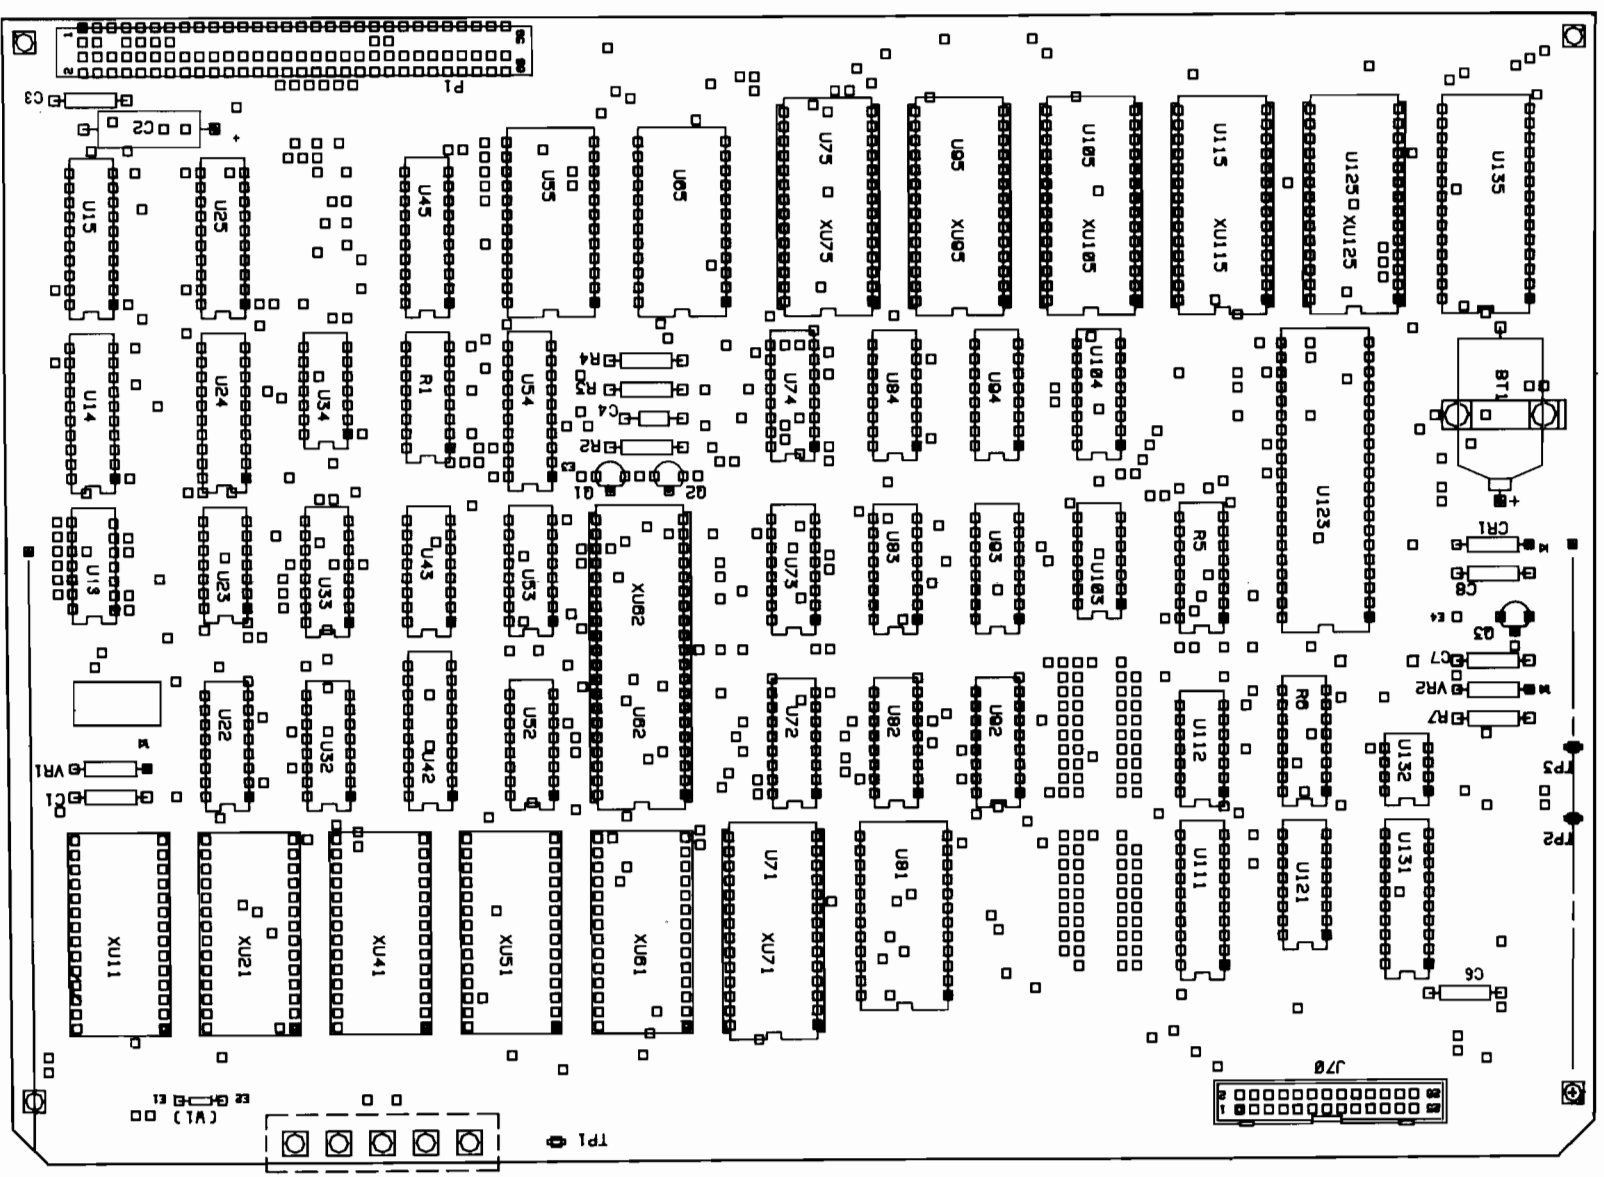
Formatter PCA (02563-60012), Parts Location
